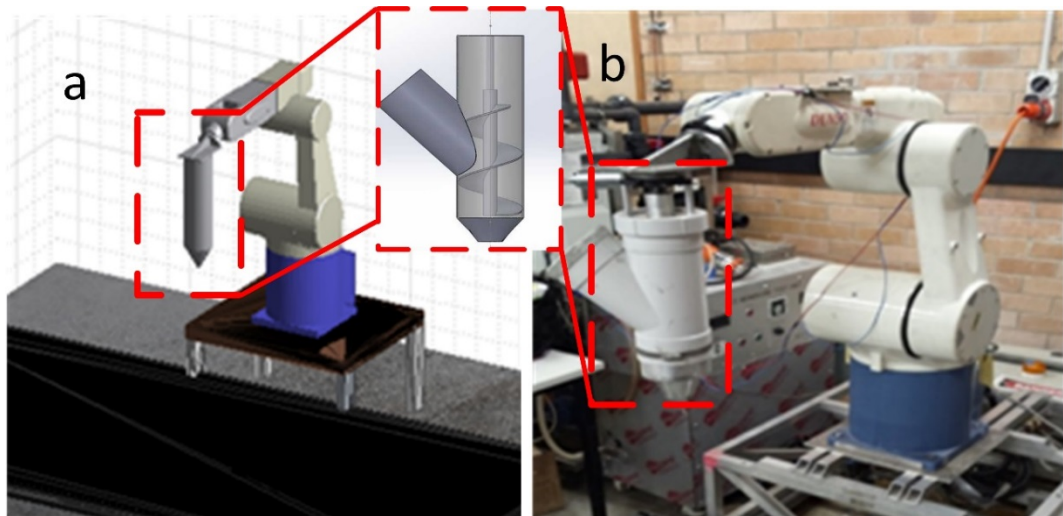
4: (a) Simulated Robot with a print nozzle assembly attached, to demonstrate and check motion plans and paths. (b) Real world robot and auger nozzle assembly.
